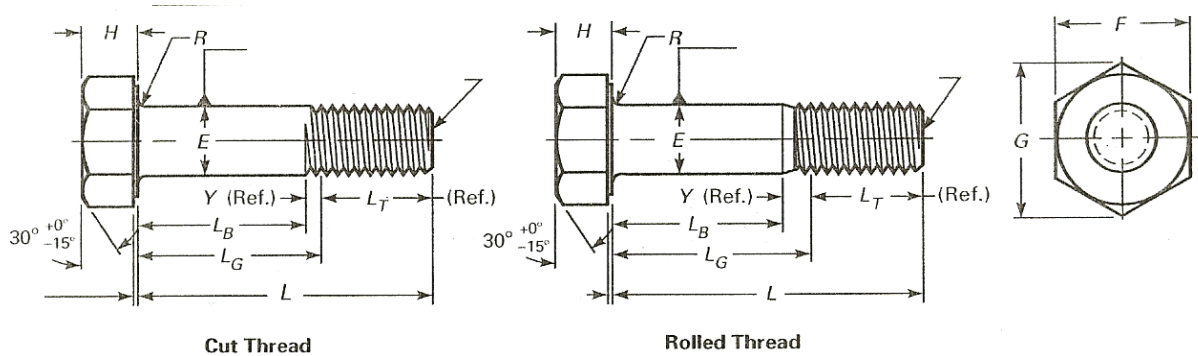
Hex-Head Bolt Dimensions (ASME B18.2.6 2006)
